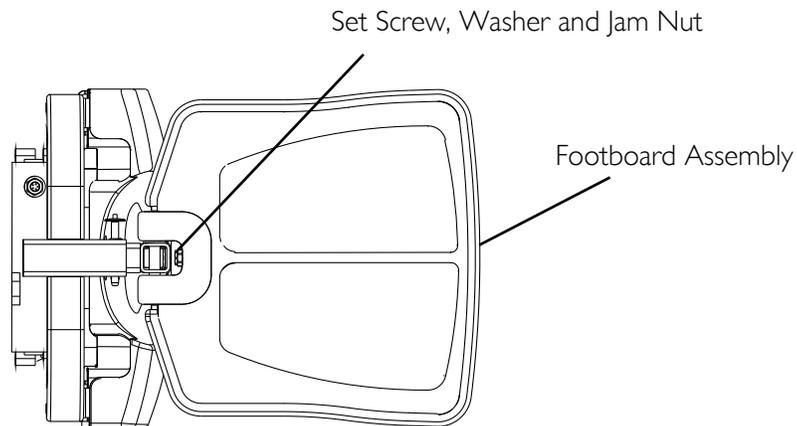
Removing/Installing the Footboard Assembly
